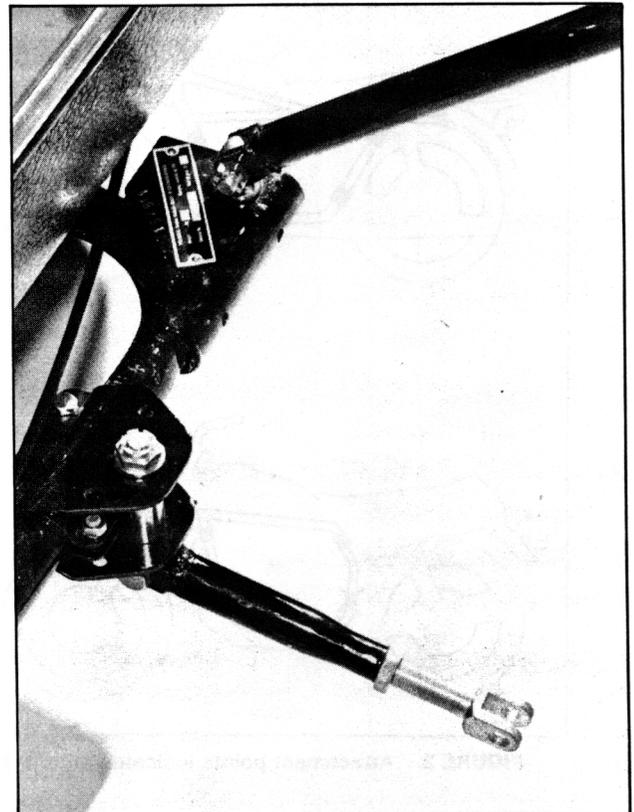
Clevis Adjusting Bolts must line up with Eyebolts. Note bottom front U-Clamp attached to cross tube of frame.
